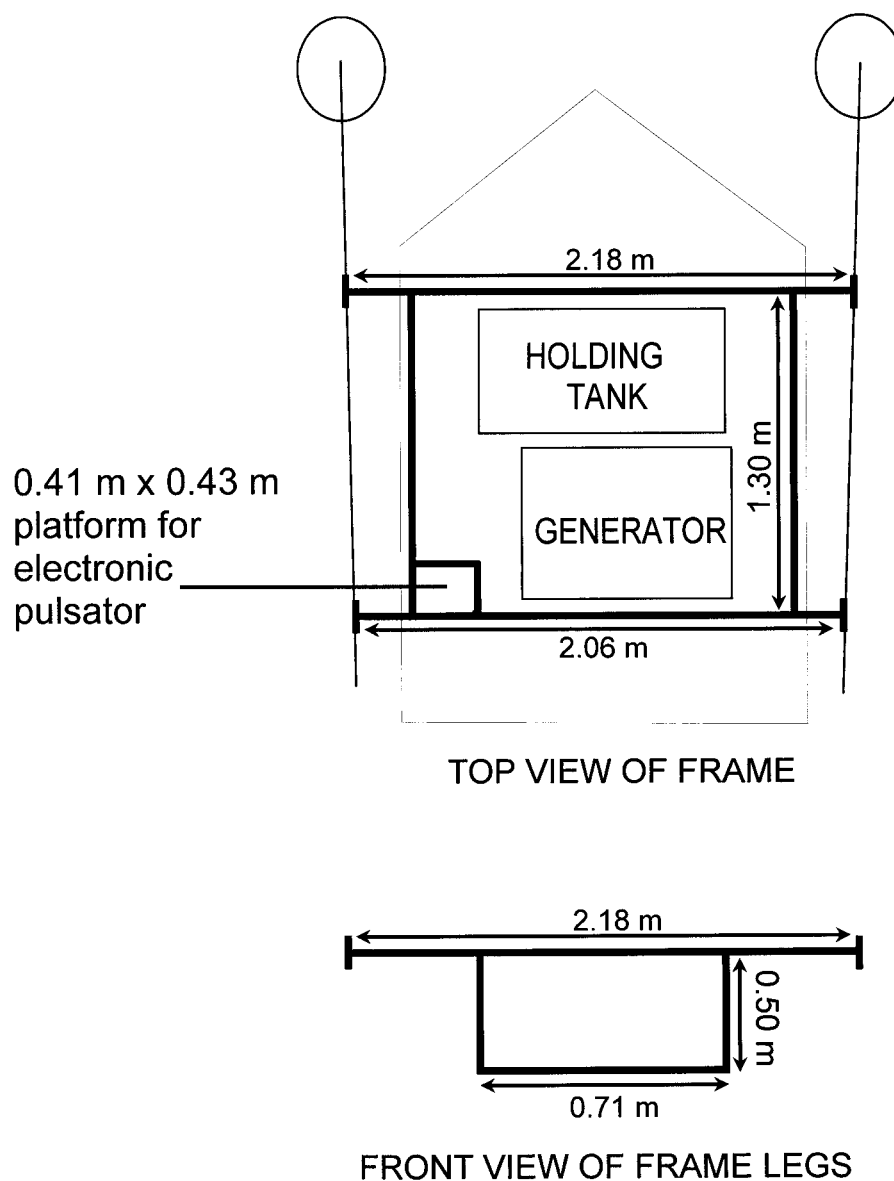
Top view and dimensions of the electrofishing frame and front view and dimensions of the frame legs.
